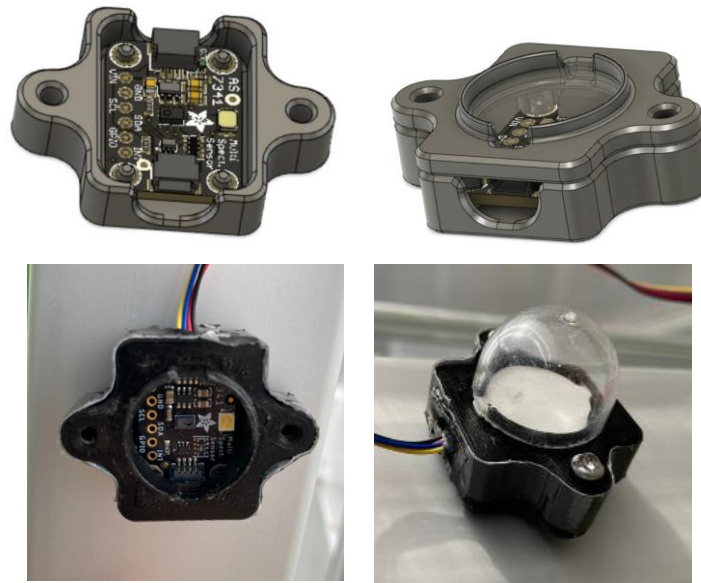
CAD Scheme of the sensor casing (upper left and right) and image of sensor casing with (lower right) and without (lower left) light damping filter and plastic dome.
